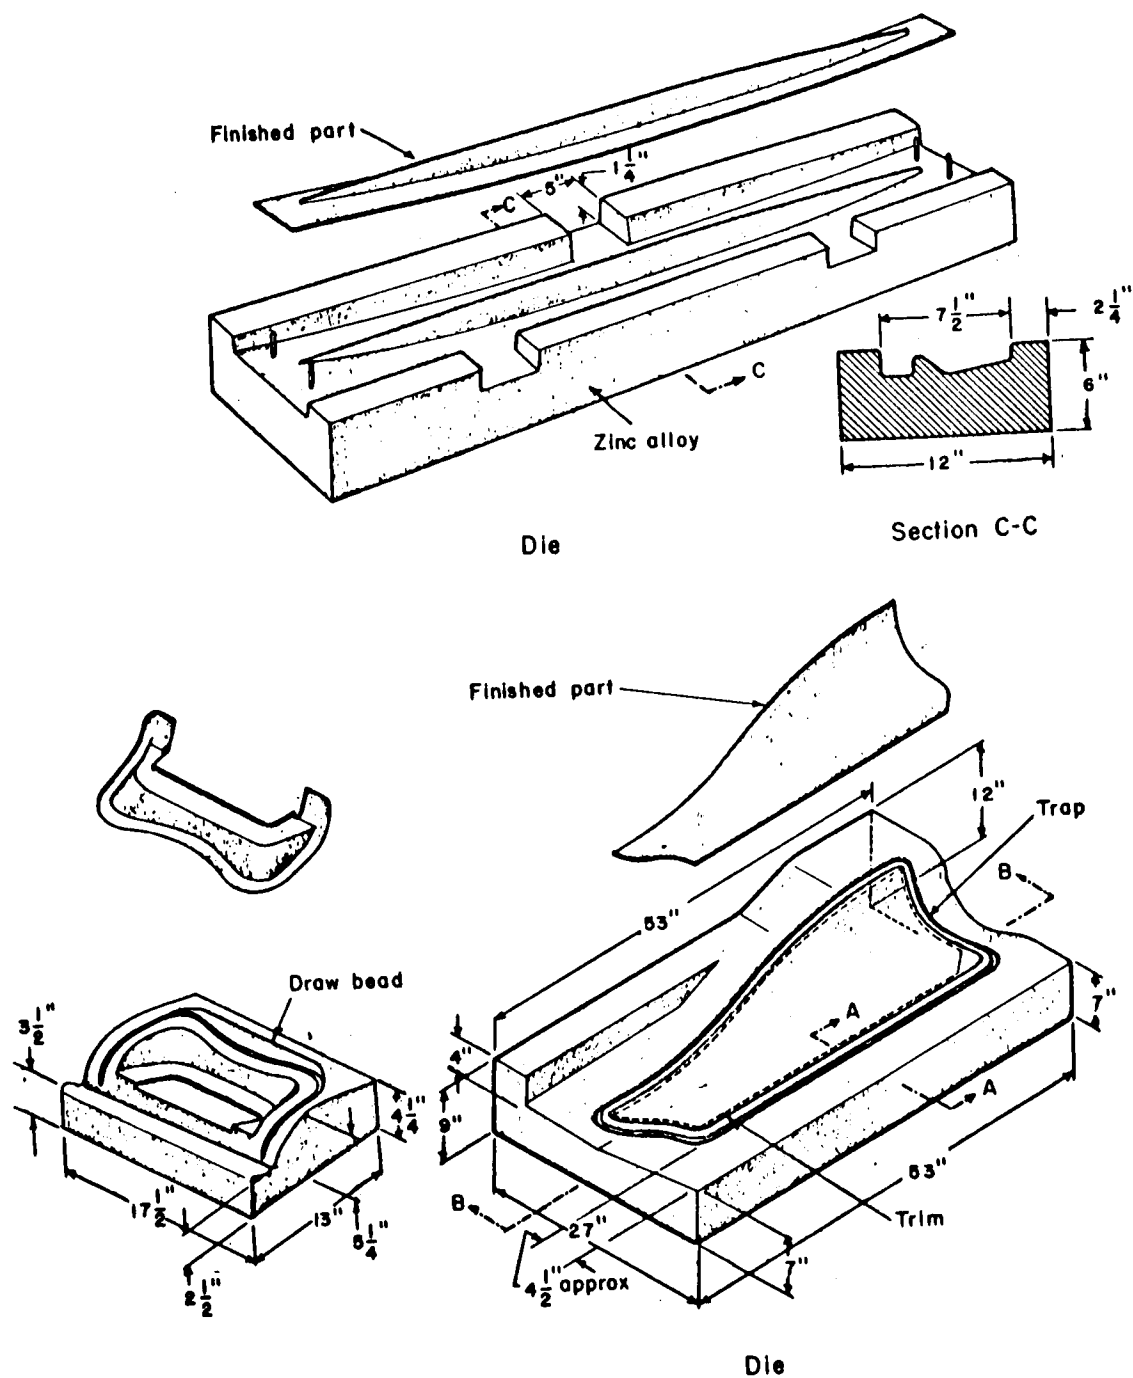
TYPICAL DROP-HAMMER DIES AND FORMED PARTS (REF. 43)
